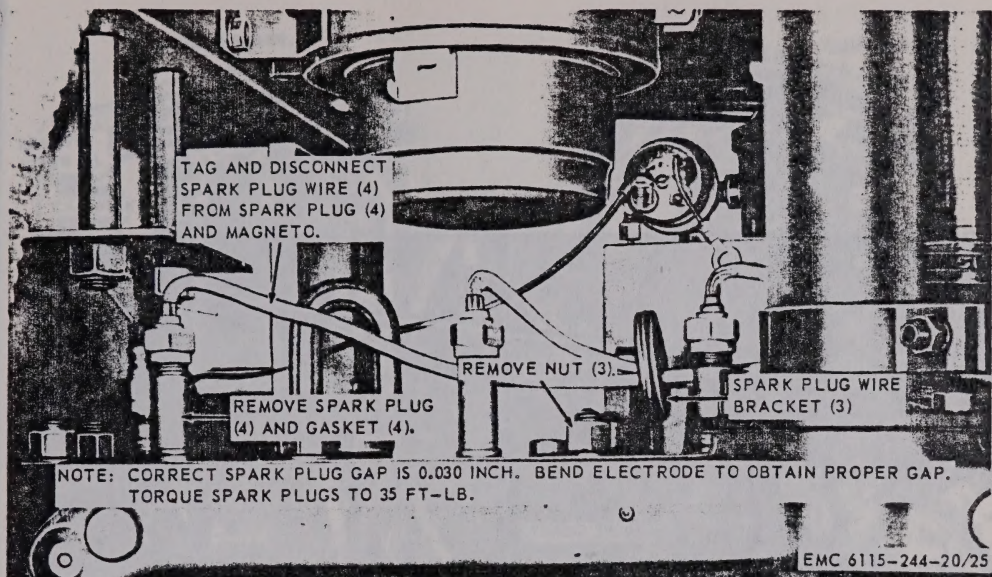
Spark plugs, spark plug wires, and spark plug wire brackets, removal and installation.
